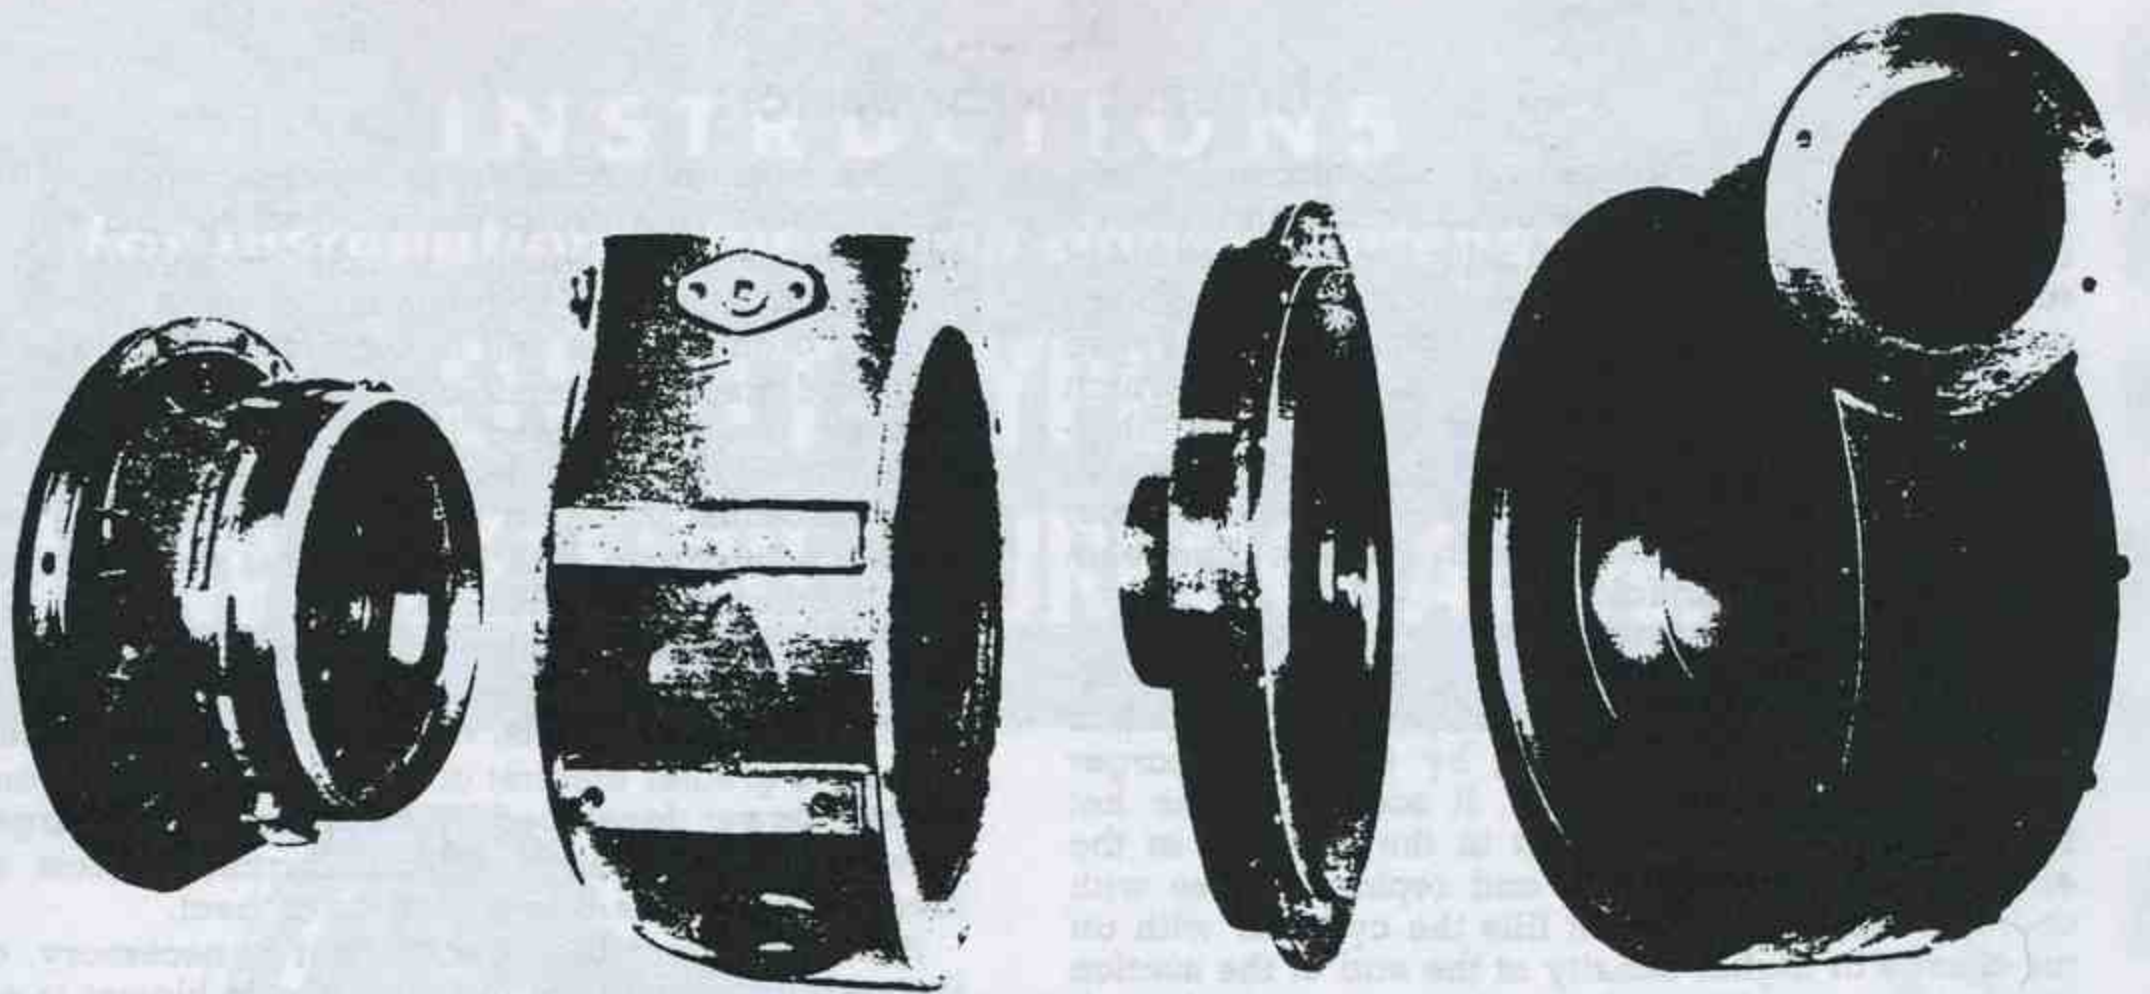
Left to right: Inlet Casing Assembly, Turbine Casing, Intermediate Casing, Blower Casing Assembly.
